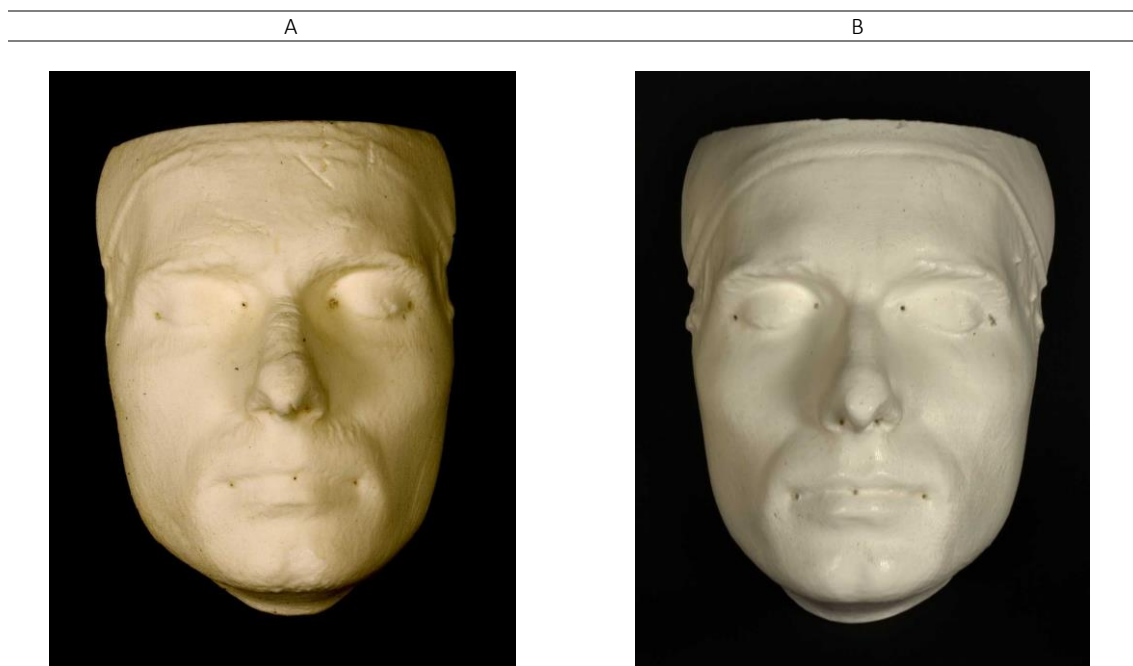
CNC foam milling compared with 3D printing (FDM) to fabricate a positive mould used for vacuum forming; a) The positive foam mould fabricated using CNC milling; b) The positive PLA mould fabricated using FDM printing.
